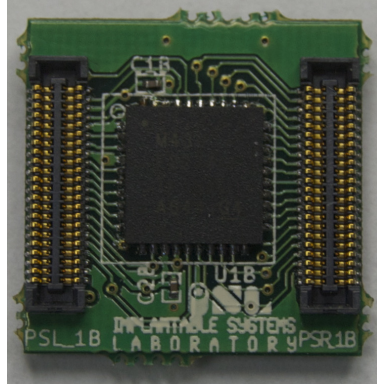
Microcontroller Module – prototype 2 PCB layout.
